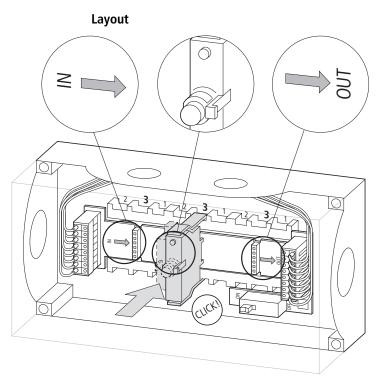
Surface-mounting enclosure with PCB and M22 SWD base function element
